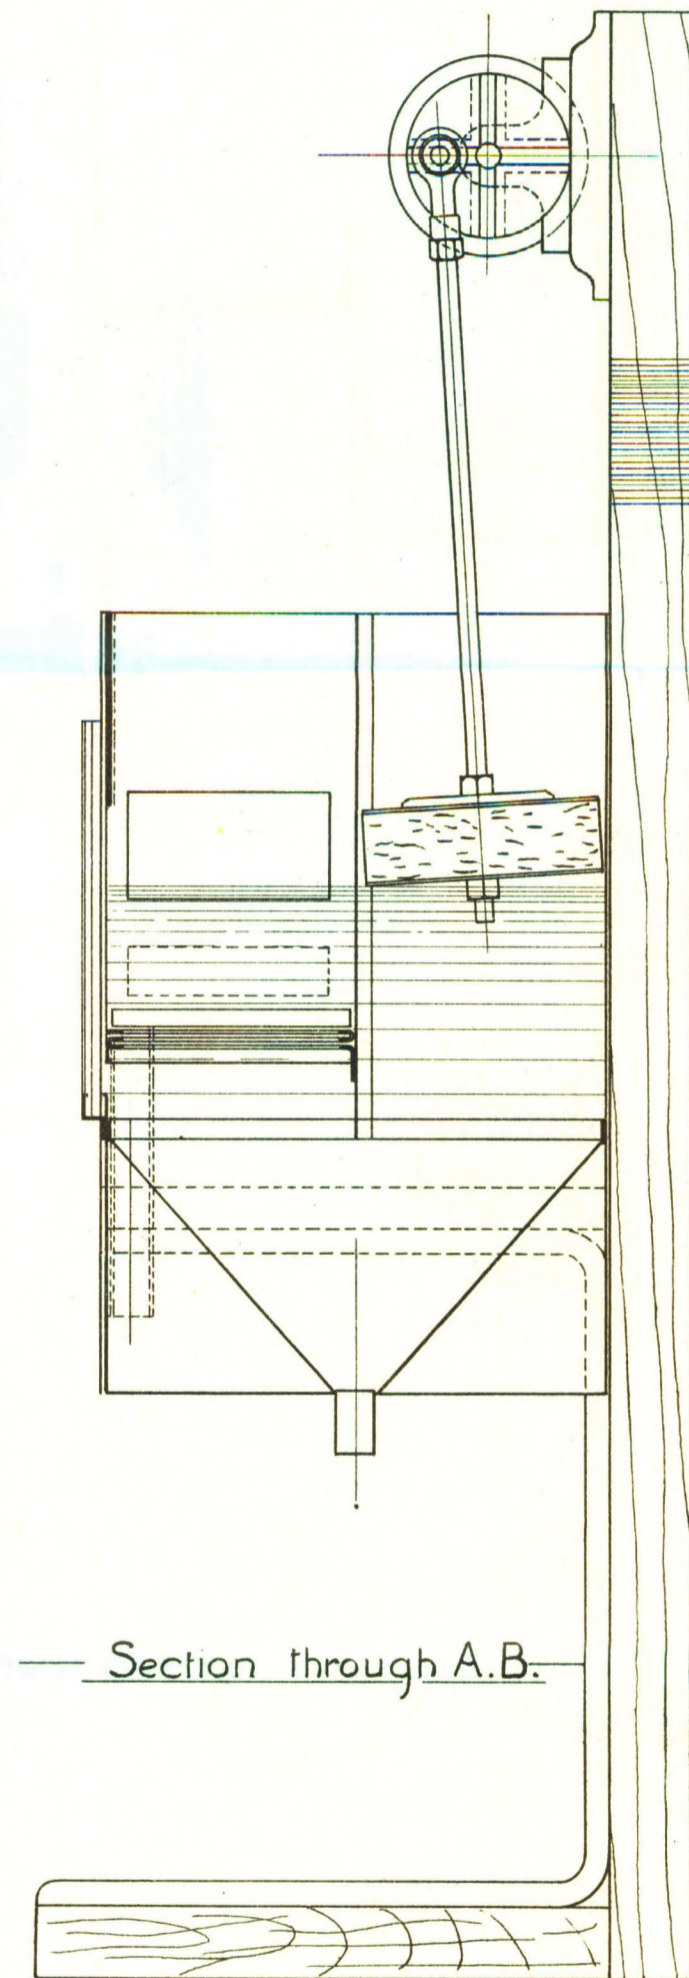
Sectional elevation of Jeffrey-Robinson washing plant.
